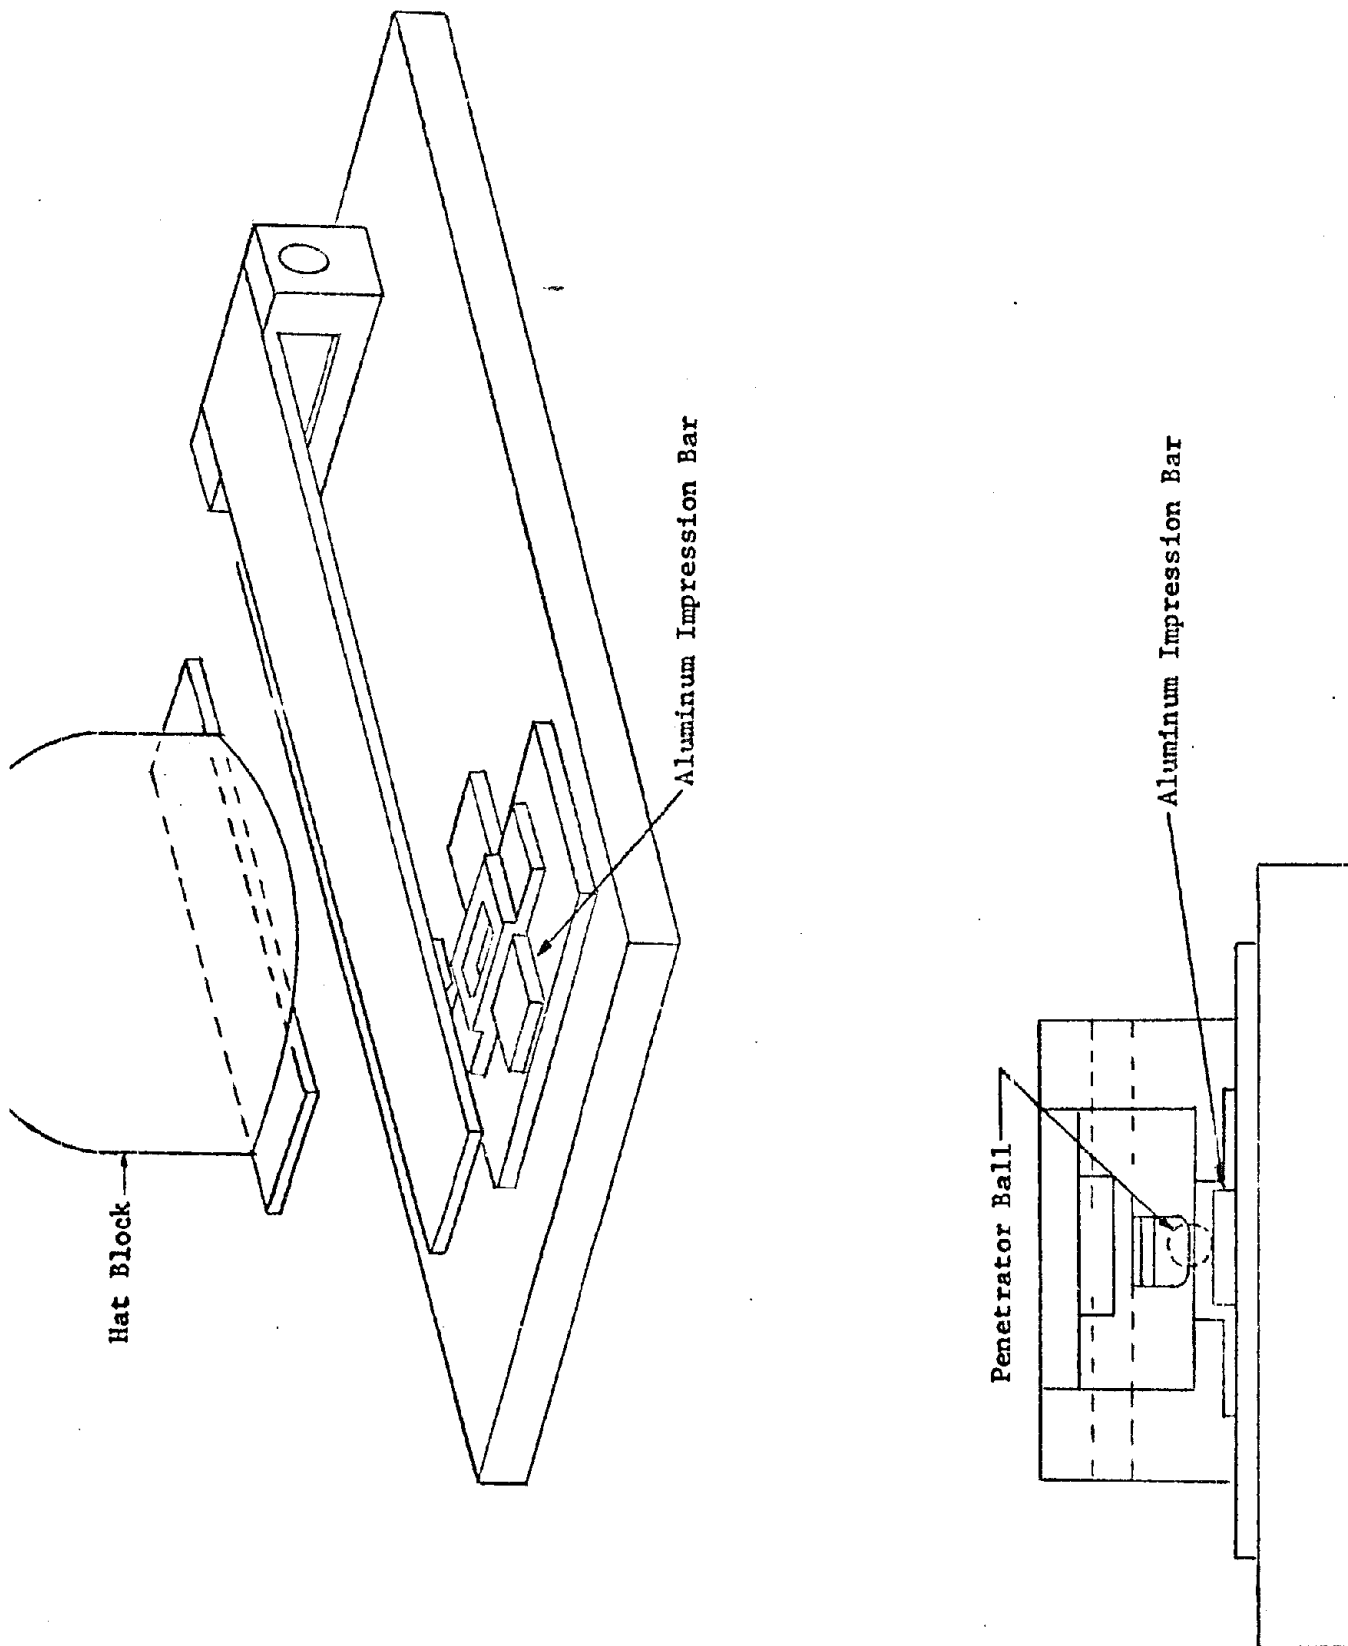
BRINELL PENETRATOR IMPACT ASSEMBLY
